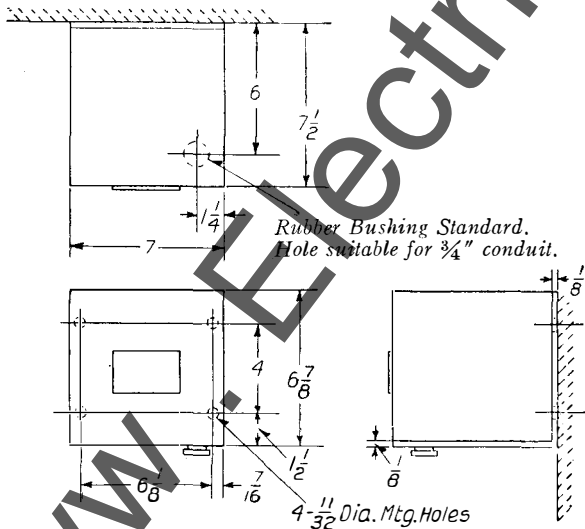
OUTLINE AND MOUNTING DIMENSIONS
